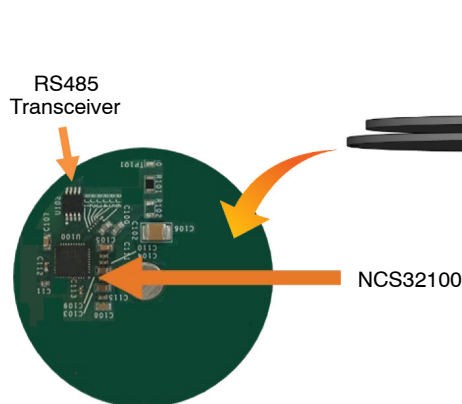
Example of Inductive Encoder 4 Layer PCB Stator with NCS32100 Package and External Components on the Back of the Board (Contains Transmitter Loop and Receiver)
